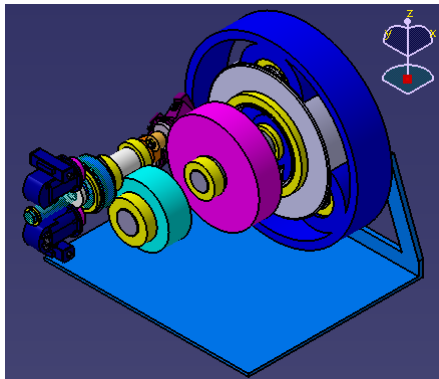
Assembly of the mechanical parts of the drive train realized in Catia V5
